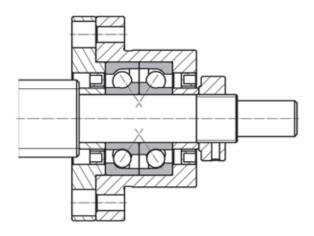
Bearing arrangement DF in fixed bearing units FK
